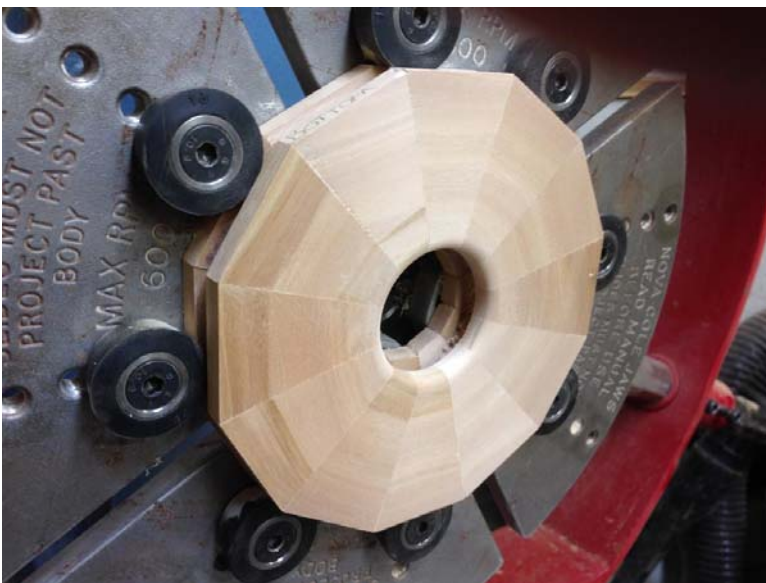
The bottom inner side of the ring has been turned round and faced off.
